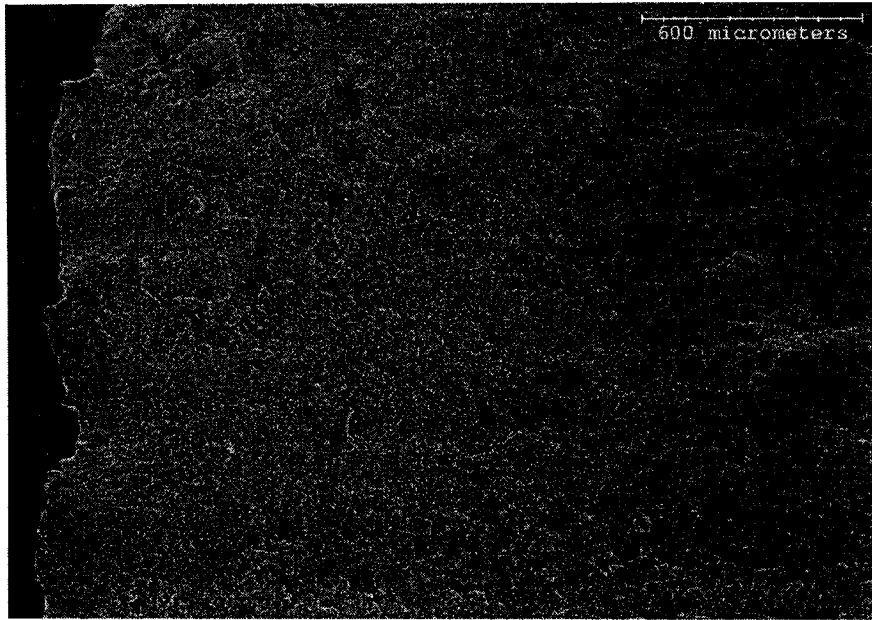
Fracture Surface of Test Specimen T6-2
